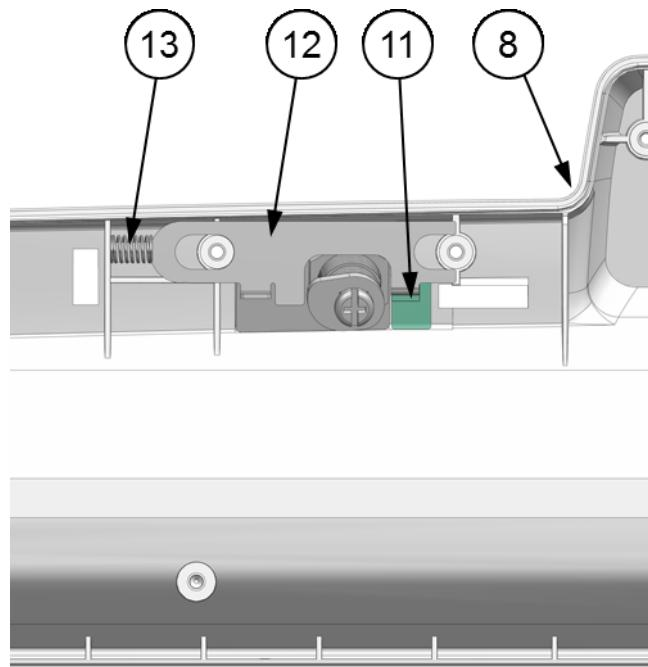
The PCA bolt cover placement in the cavity of the Front case
